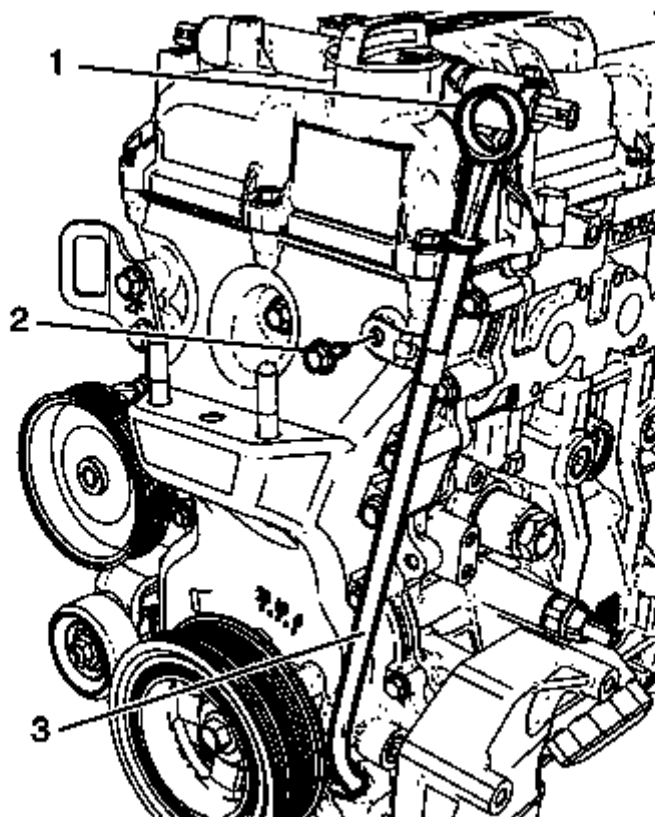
Oil Dipstick And Oil Level Indicator Tube Bolt
